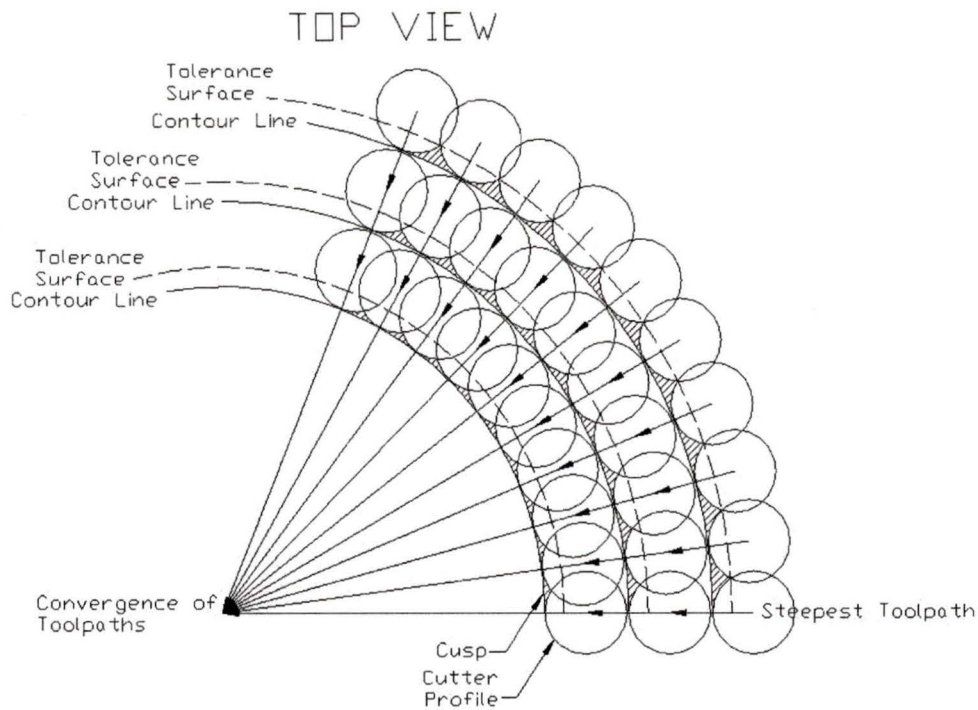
Redundant Machining Caused By Converging Steepest Paths
